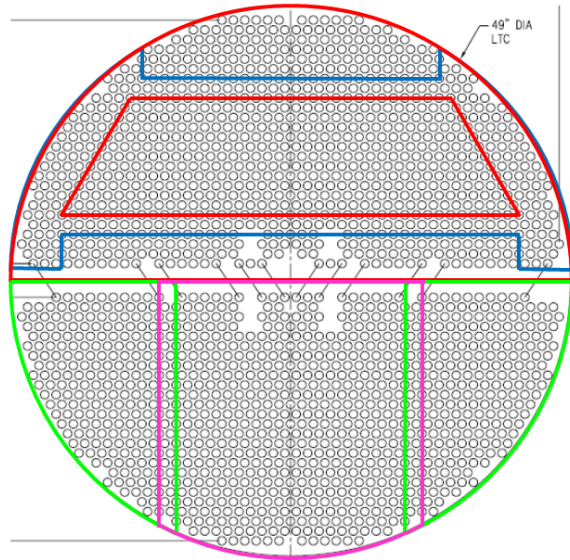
Location of Baffle Cuts superimposed on tubesheet
